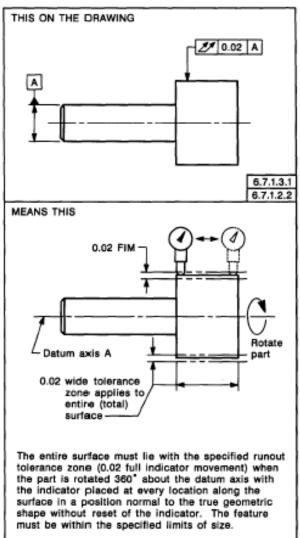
SPECIFYING TOTAL RUNOUT RELATIVE TO A DATUM DIAMETER
